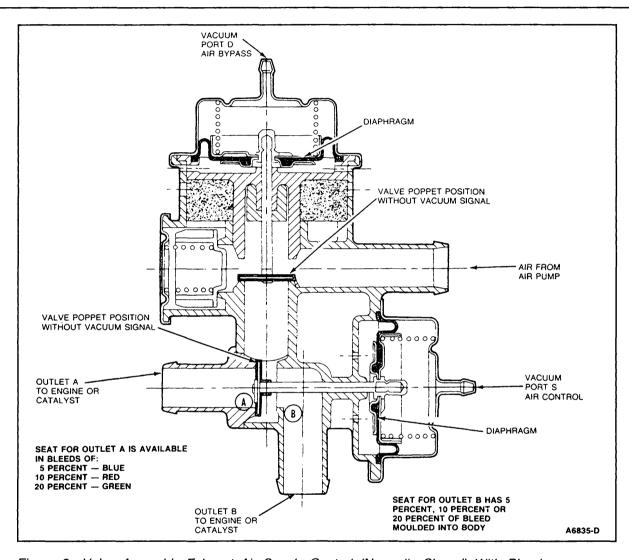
Valve Assembly Exhaust Air Supply Control (Normally Closed) With Bleed
